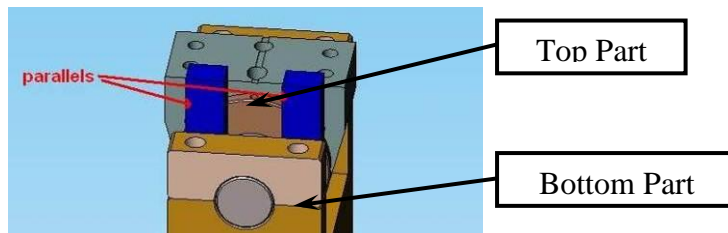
Using Shims to make sure the Bottom Part of the Locker is parallel to the Top Part
